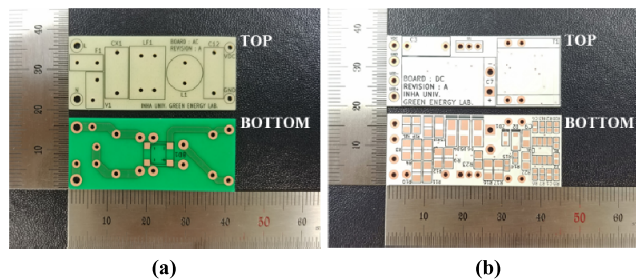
PCB outline of (a) the AC driving part, (b) the DC driving part.
